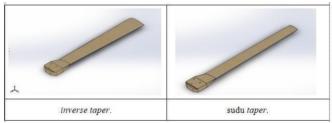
Design of inverse taper and taper NACA 6412 blades in SOLIDWORKS
